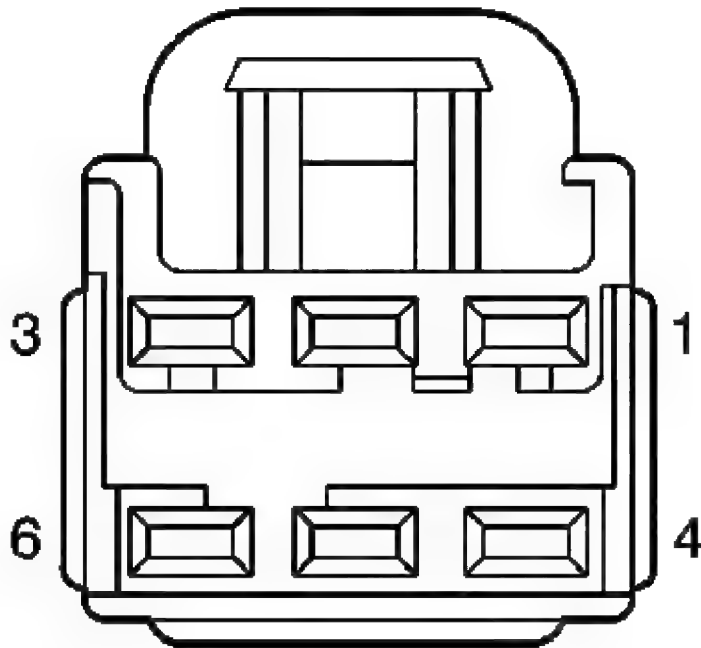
Passenger Front Seat Adjuster Motor Assembly (AG2/AH8) Connector End View
